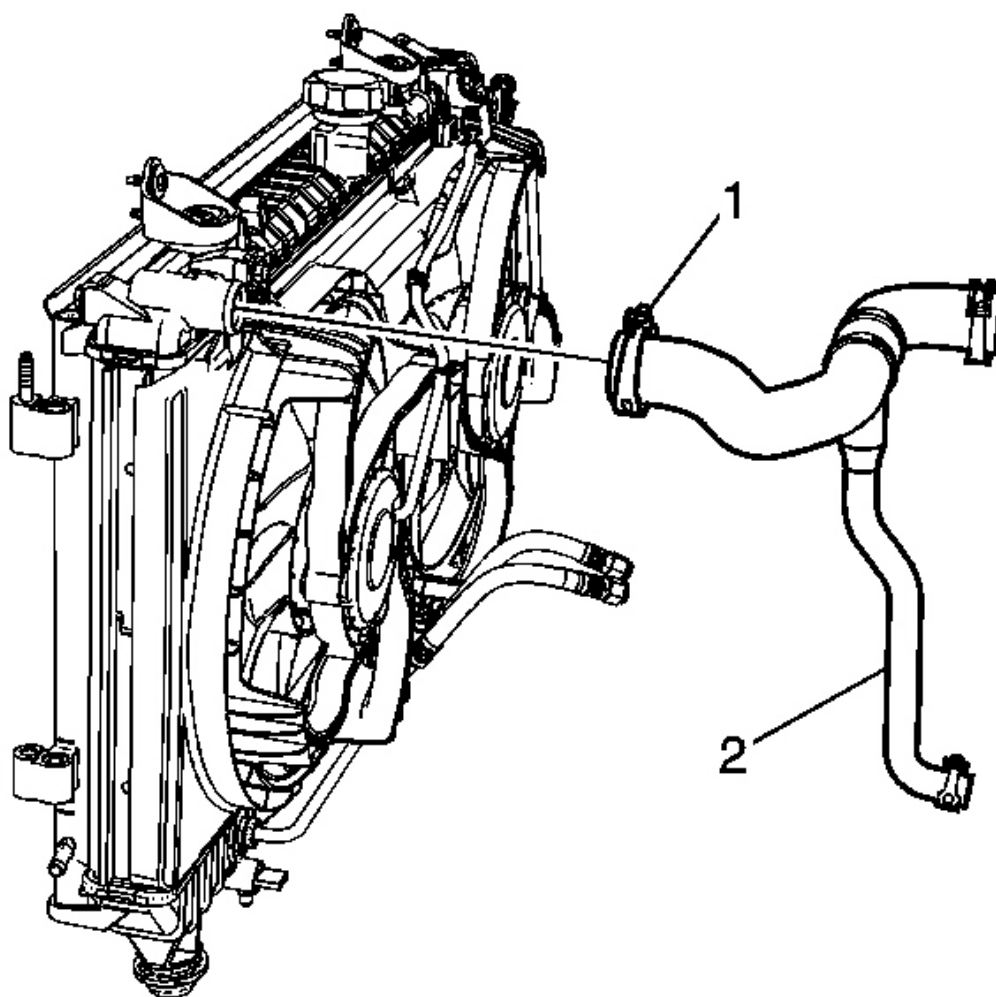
Radiator Inlet Hose & Clamp At Radiator
